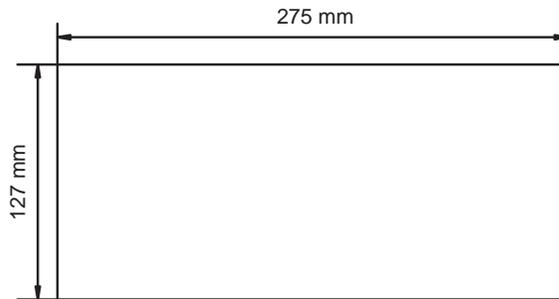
Installation Dimensions Diagram\_ Fixed-type SVG Module)
